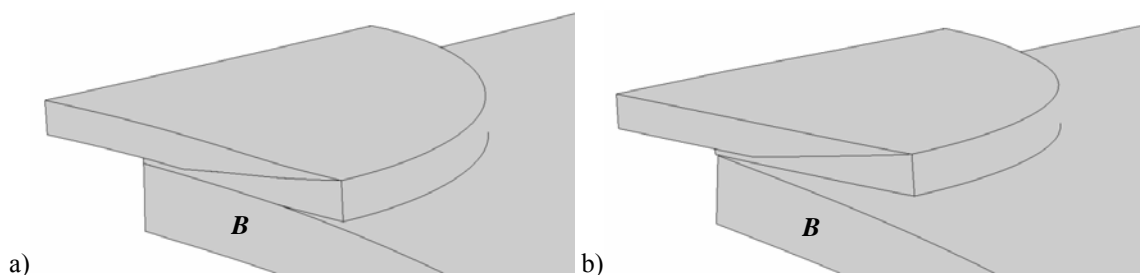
Deformed shape of the 1.2 mm patch inner chamfer repair at damage onset (a) and patch debonding (b) (bending load).
